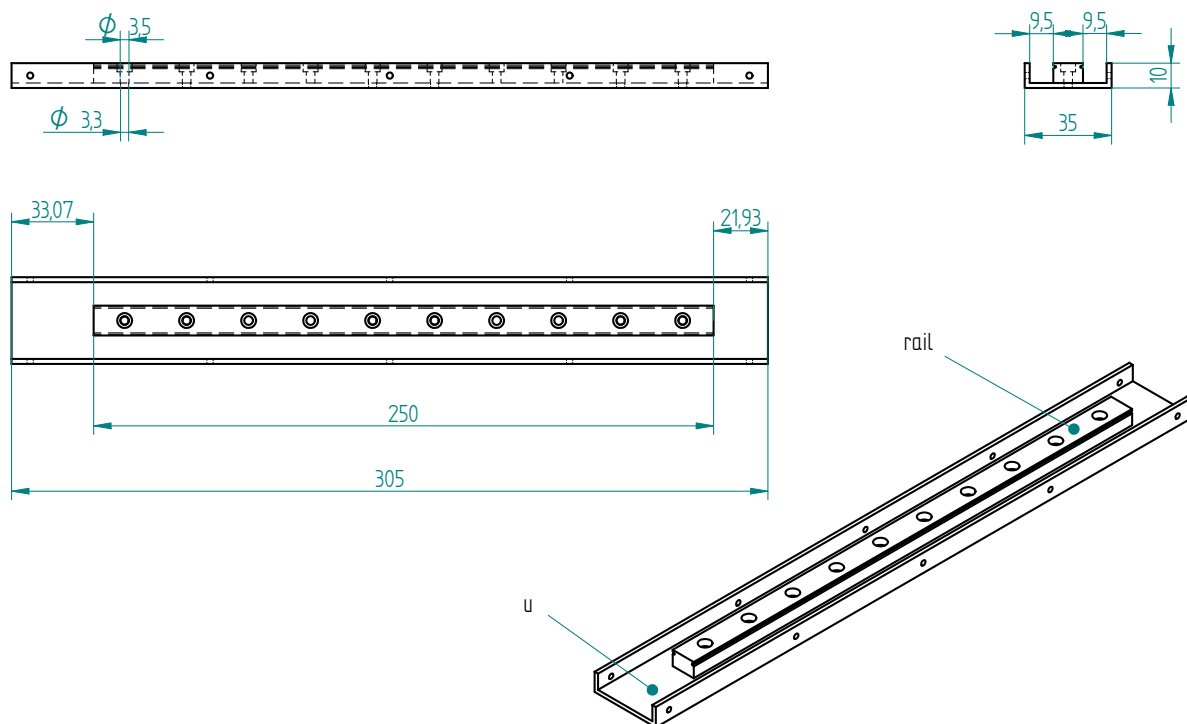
Center punch the 3.3 mm hole through the rail using a 3.5 mm drill bit
